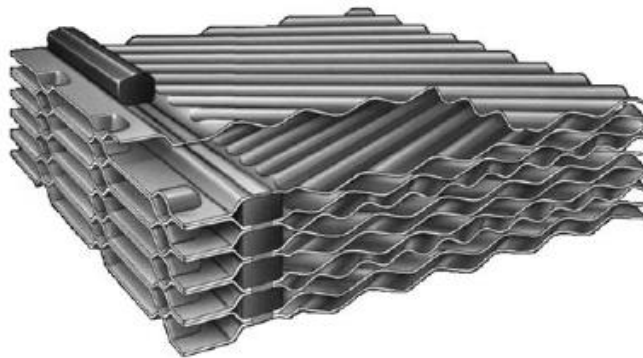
(Cross section of welded plate heat exchanger).[7]
